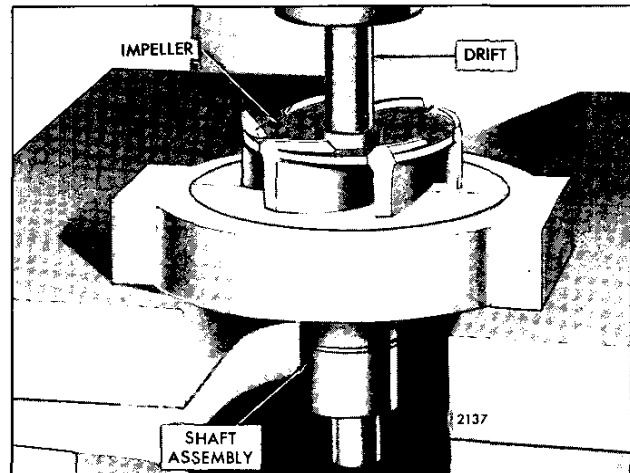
Removing Shaft from Impeller with Tools J 8329 and J 358-1
